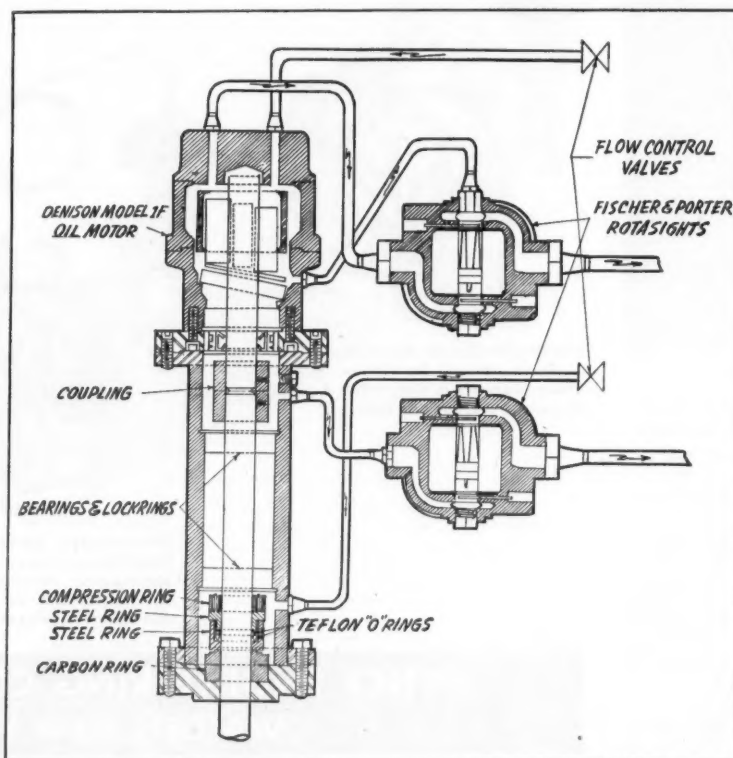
Cross-section of sealing assembly, oil motor and rotameters
